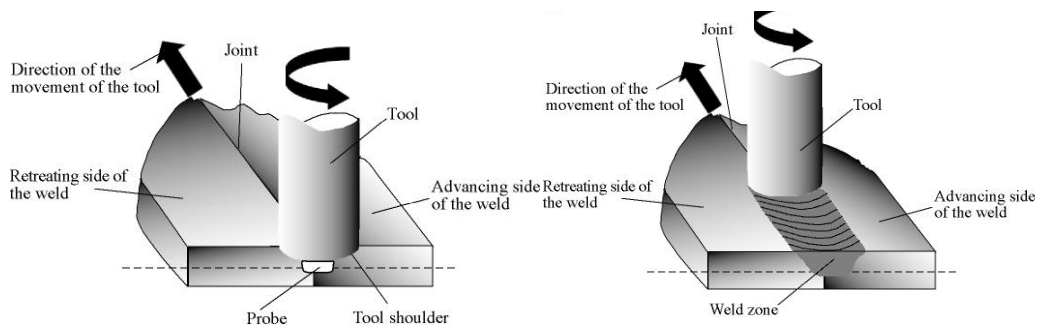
Friction stir welding process (Wiki, 2014).
